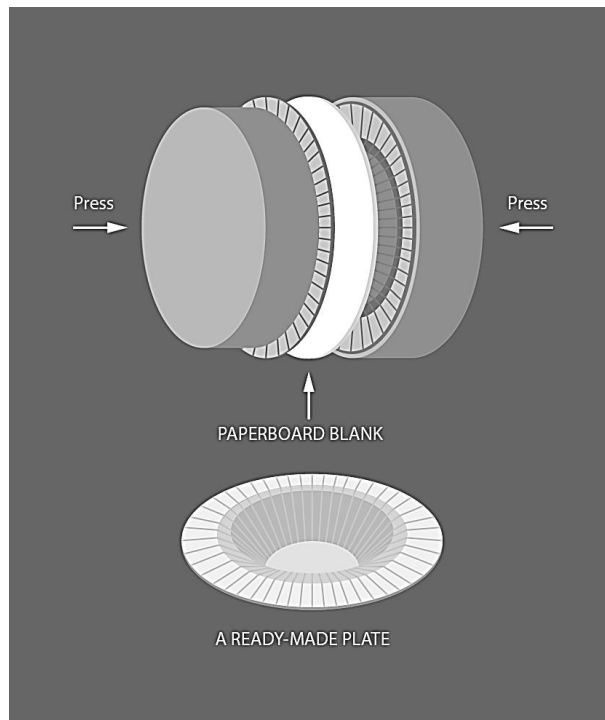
Deep drawing of paperboard tray package (Iggesund 2016a).
